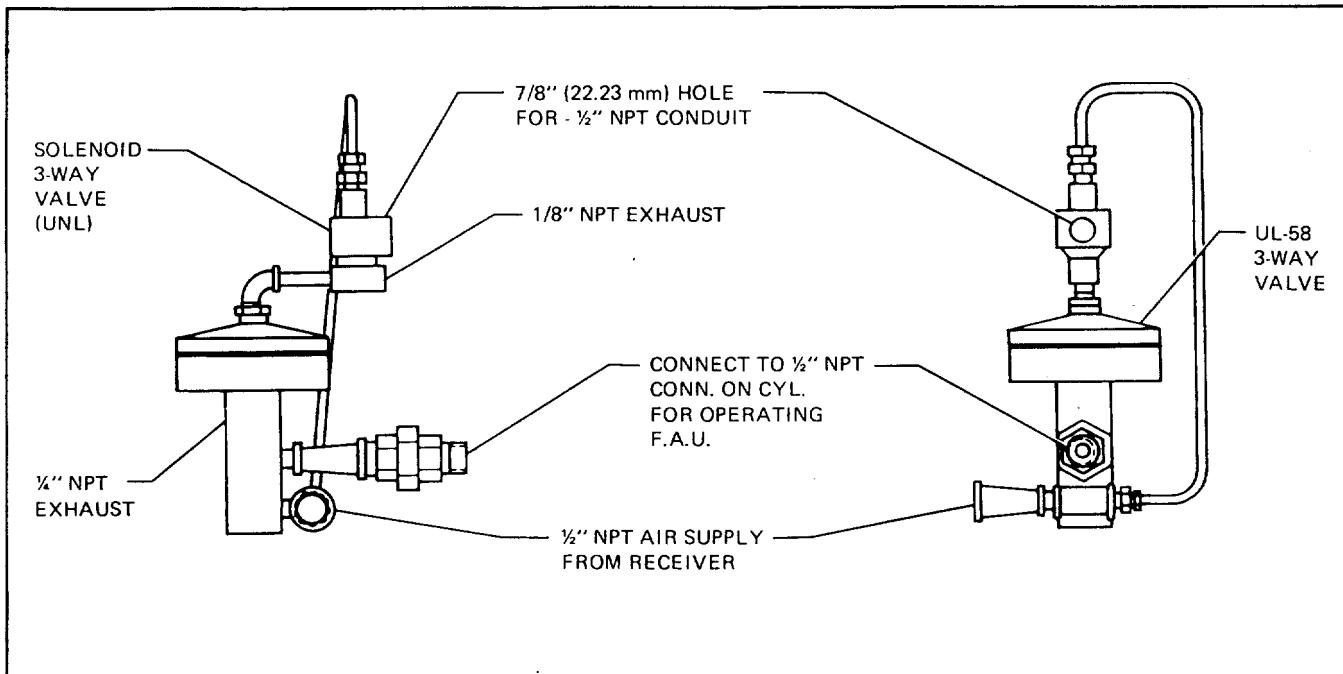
Mounting UL-58 Three-way Valve and Solenoid Valve on Cylinder.
